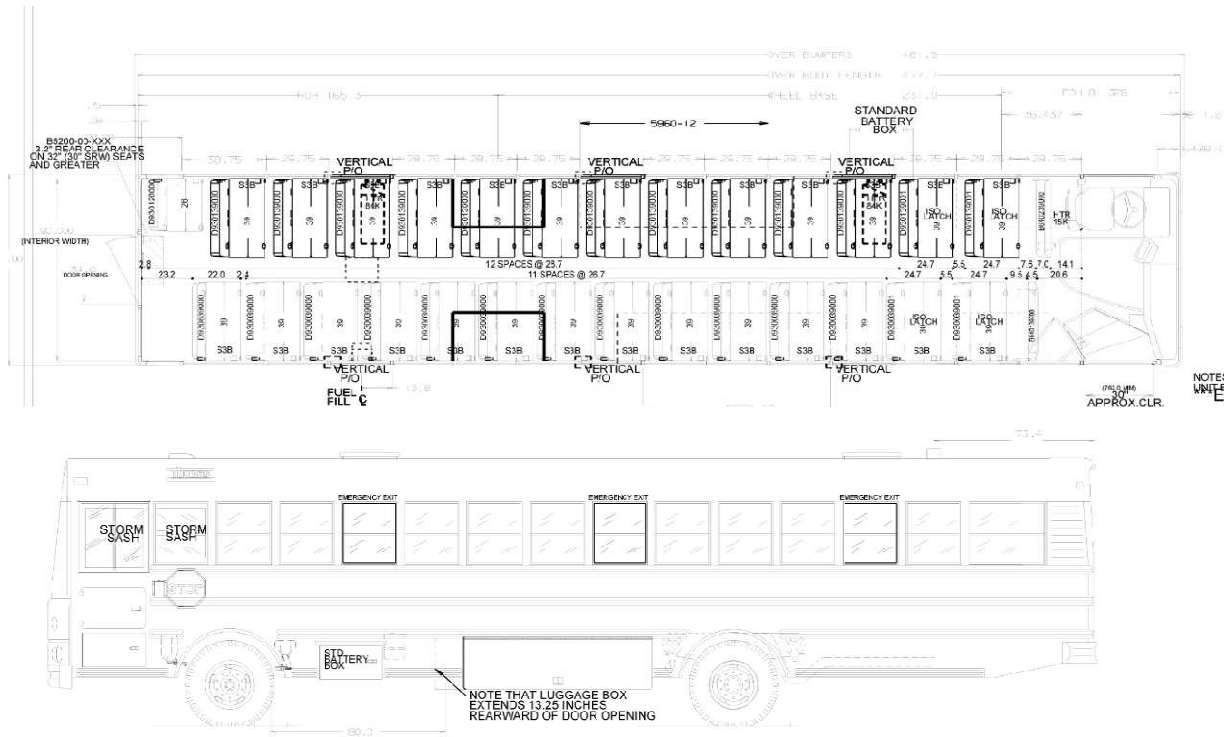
School Bus Elevation and Floor Plan
